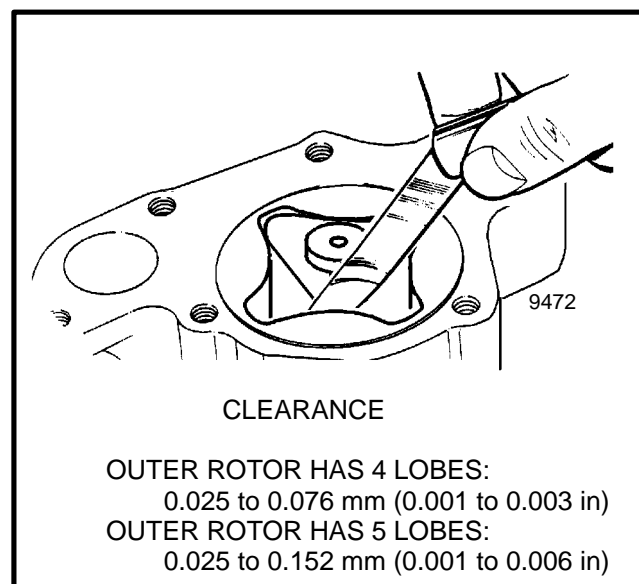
CHECK THE CLEARANCE BETWEEN ROTORS
